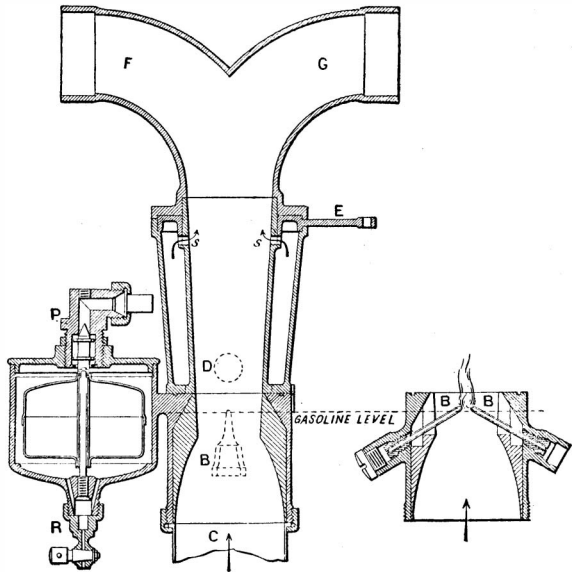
CROSS-SECTION OF THE RICHARD-BRASIER CARBURETER.
